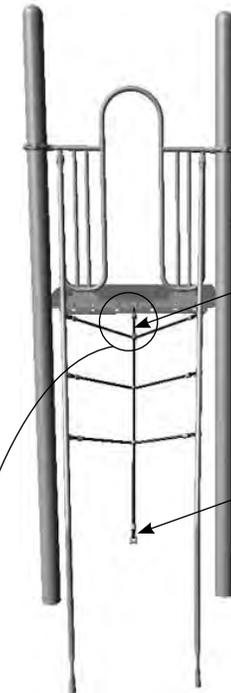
Rope barrier attached to the lower holes in the deck.
